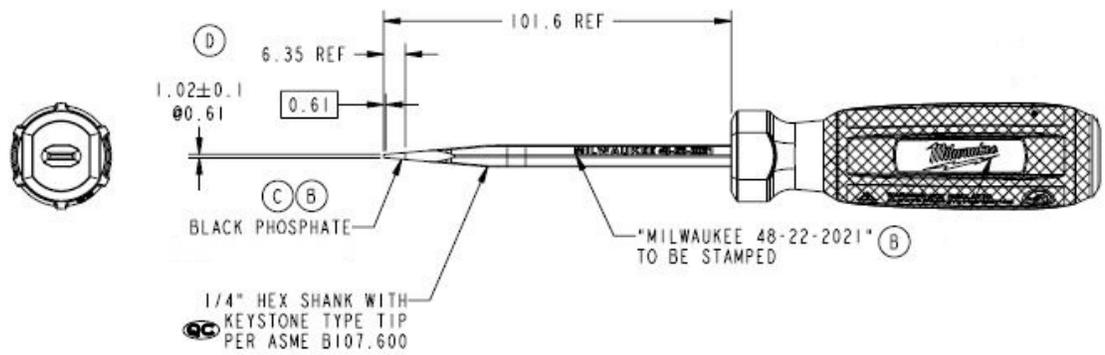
Engineering Drawing of Straight Screwdriver
